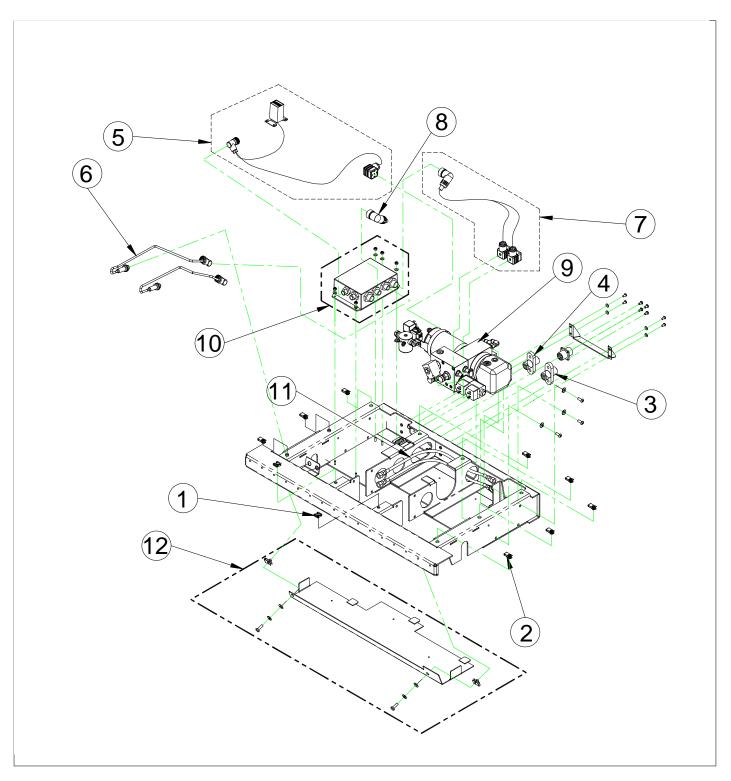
ENCLOSURE ASSEMBLY WITH ELECTRICAL & HYDRAULIC COMPONENTS
